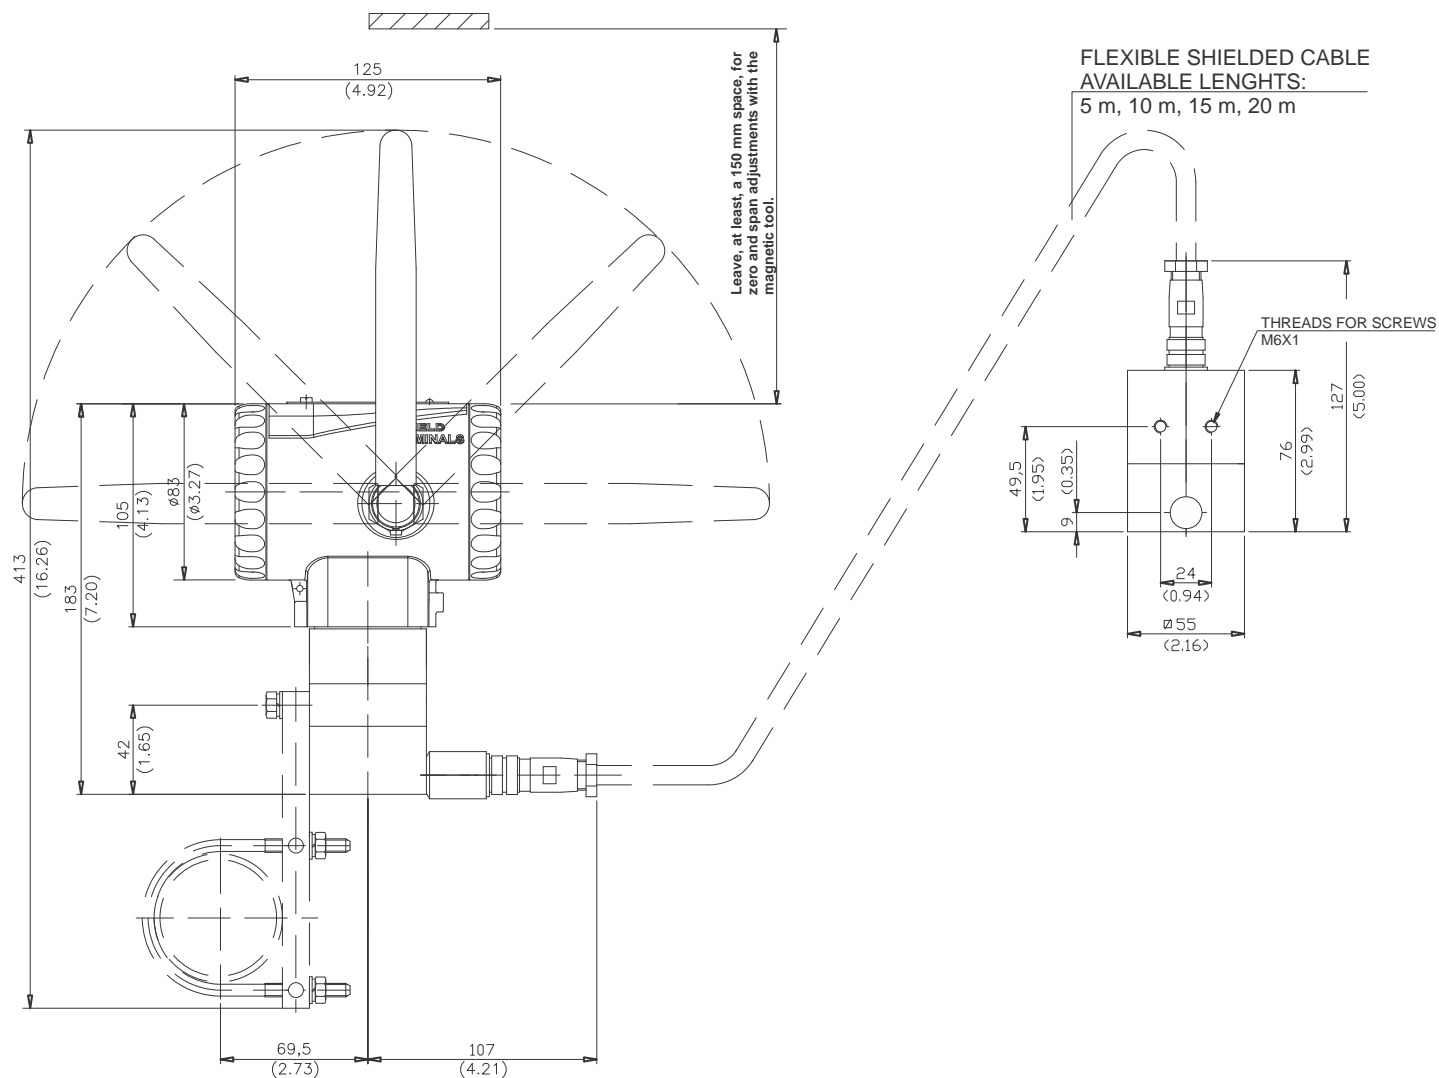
Dimensional Drawing of TP400 WirelessHART™ with Remote Sensor
